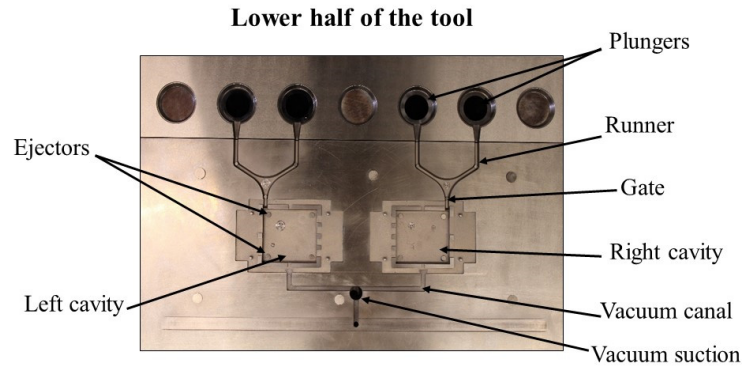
Mold tool used to encapsulate the demonstrator in transfer molding machine
